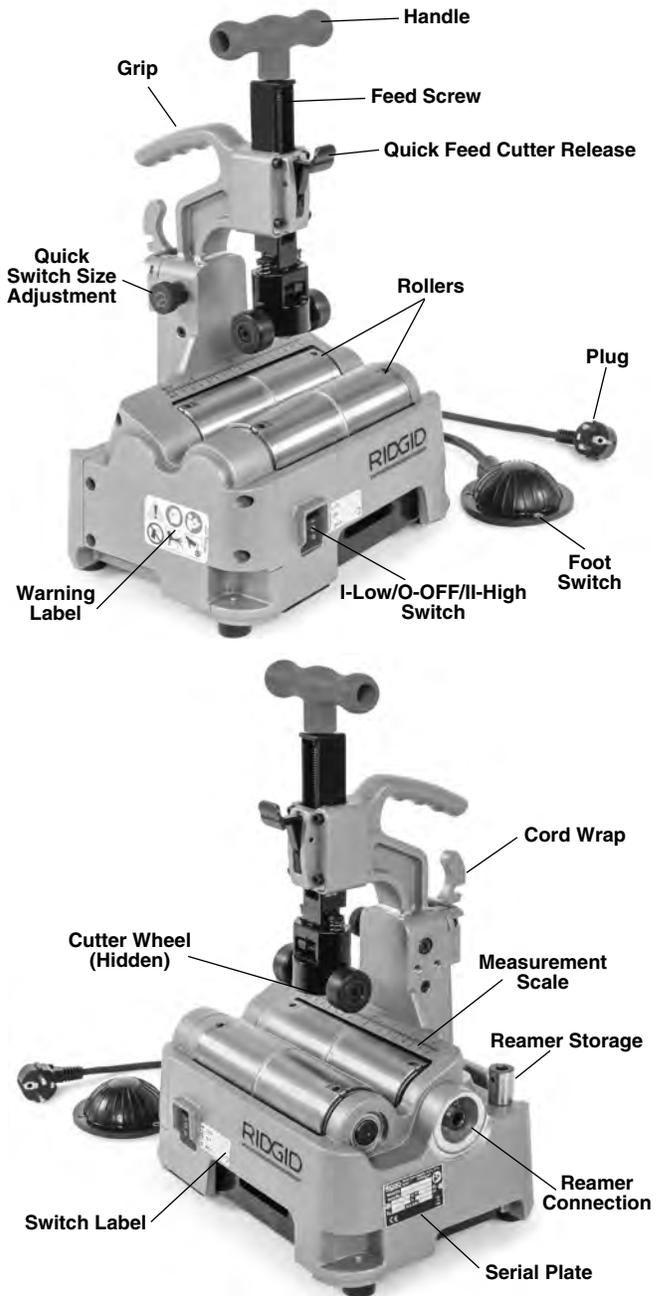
RIDGID® PC116 Power Tubing Cutter
